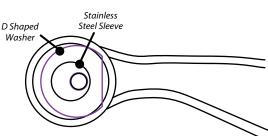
top view showing how the D shaped washer aligns with the stainless steel sleeve. Hold the D-shaped washer in this position as it is tightened.
